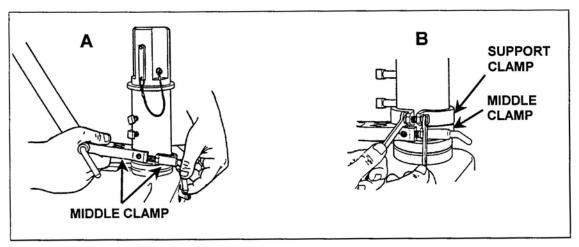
Attachment of clamps to HMMWV amament pedestal carrier.
